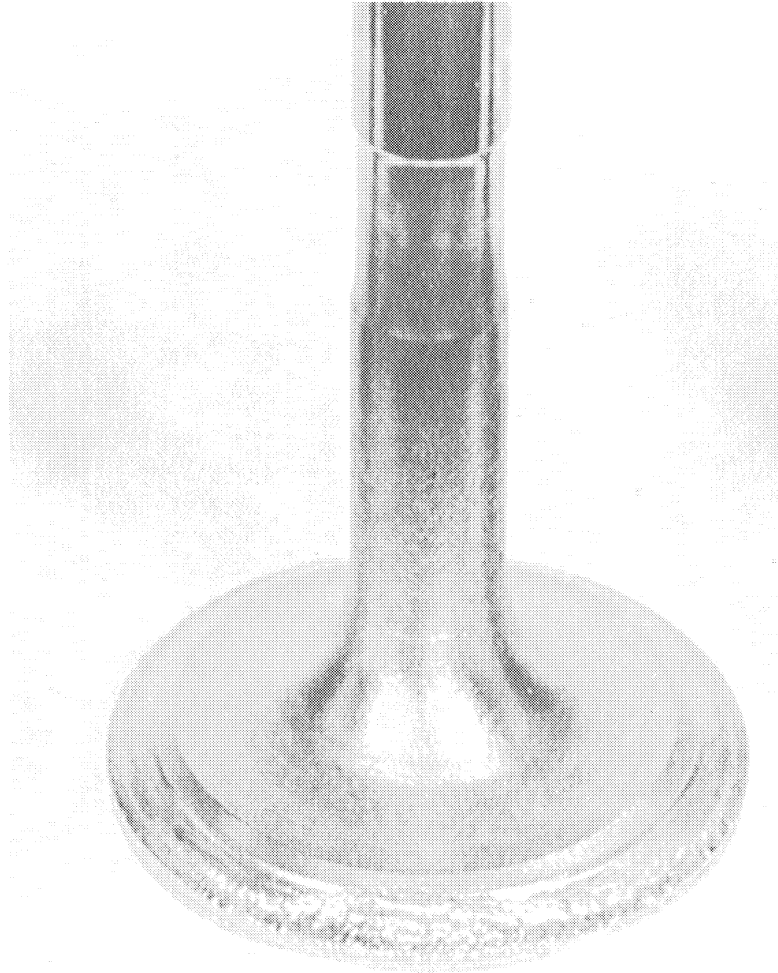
Accelerated galvanic corrosion occurring within the seating area of exhaust valves.
